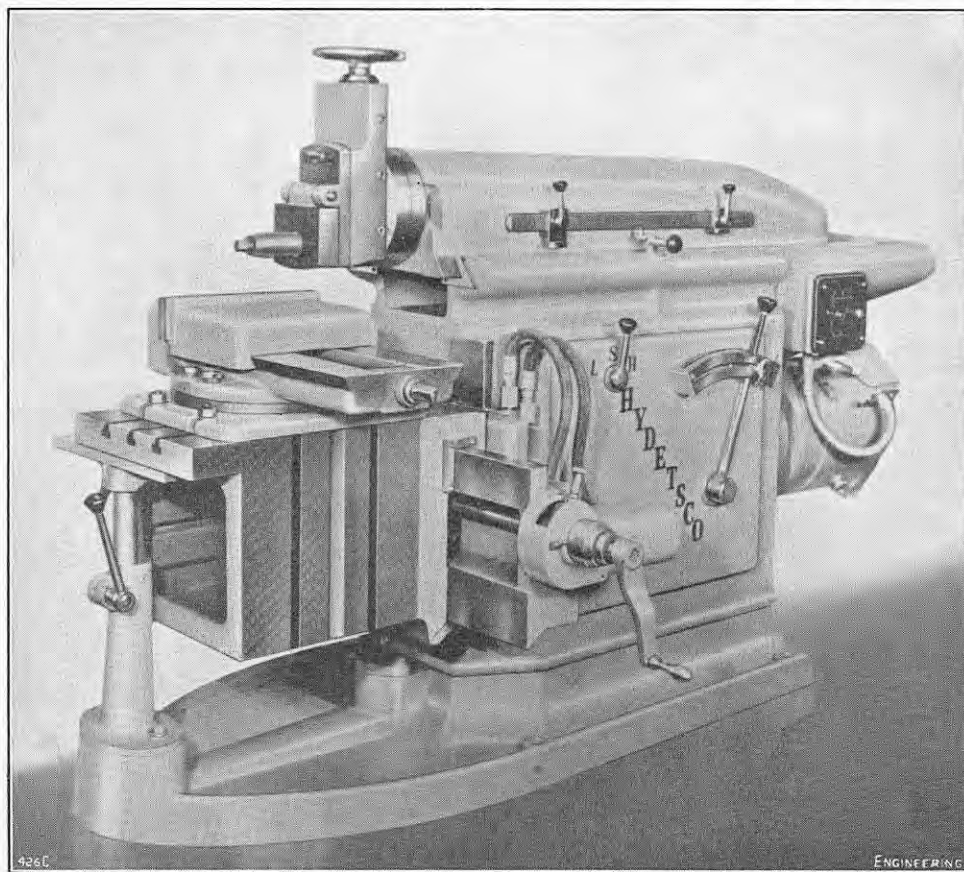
"HYDETSO" SHAPING MACHINE: ENGINEERING TOOL AND SUPPLY COMPANY, LIMITED.
